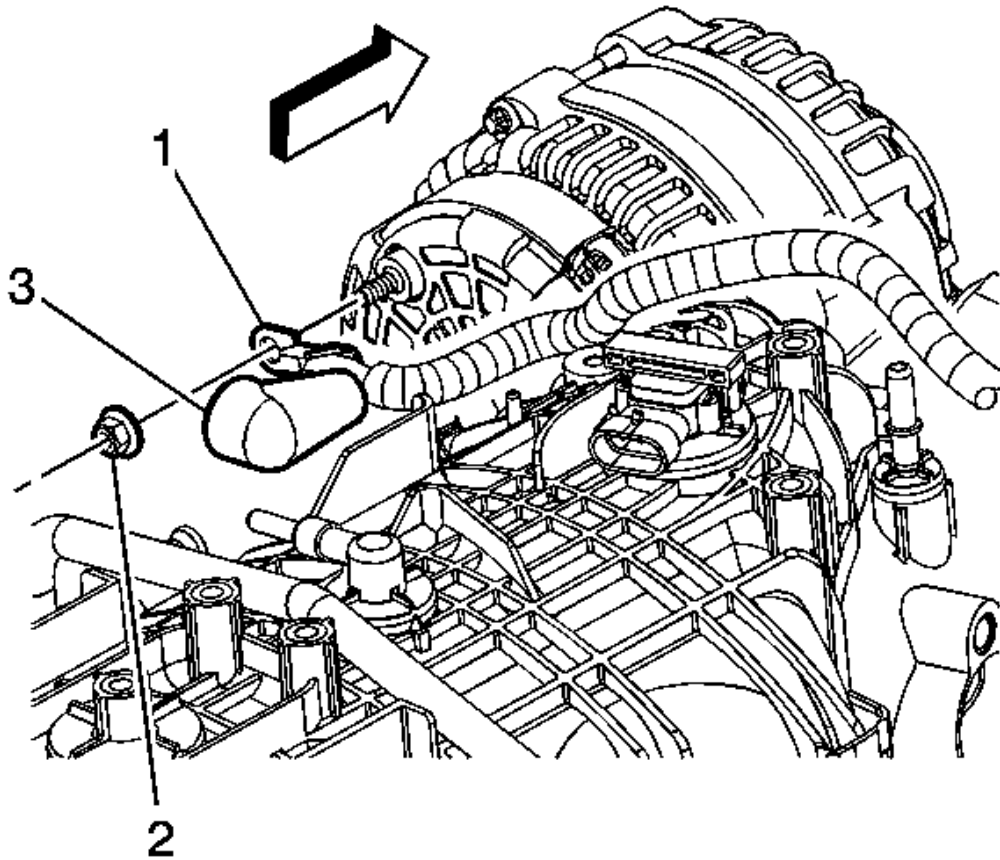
View Of Battery Jumper Cable Terminal, Nut & Bolt
